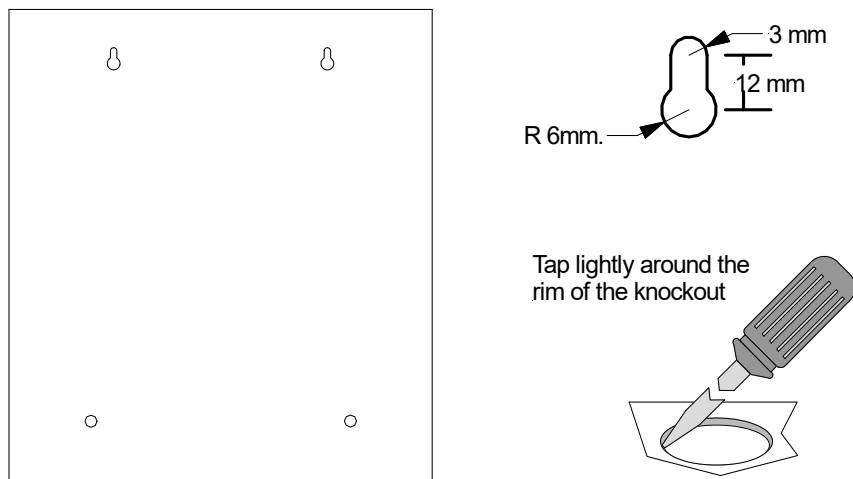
Example SP1X Back Pan Mounting Hole & Removing Knockouts
